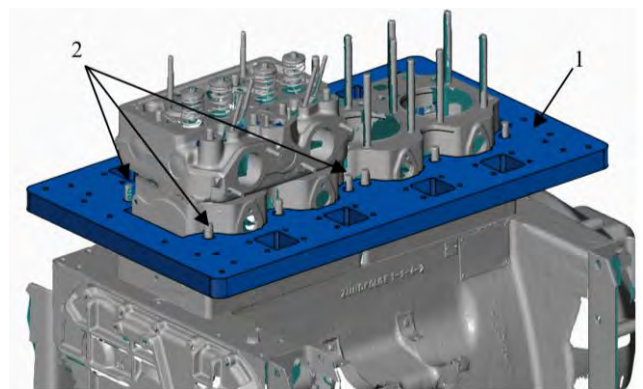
3D scan of the base engine with the CAD model of the main support plate of the cylinder block shift mechanism: 1 – support plate; 2 – threaded parts of the plate fixing pins (screwed with nuts)
